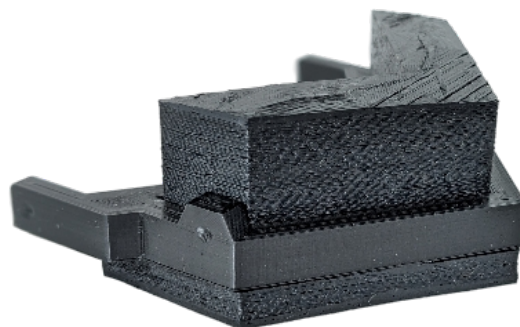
Picture of the manufactured sub-assembly: knob + chain link.
